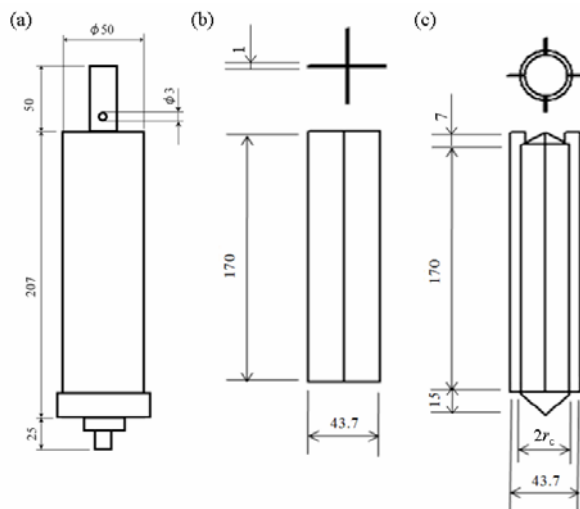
Details of: (a) the centrifugal separator; (b) the conventional blade; (c) the cylindrical blade.
